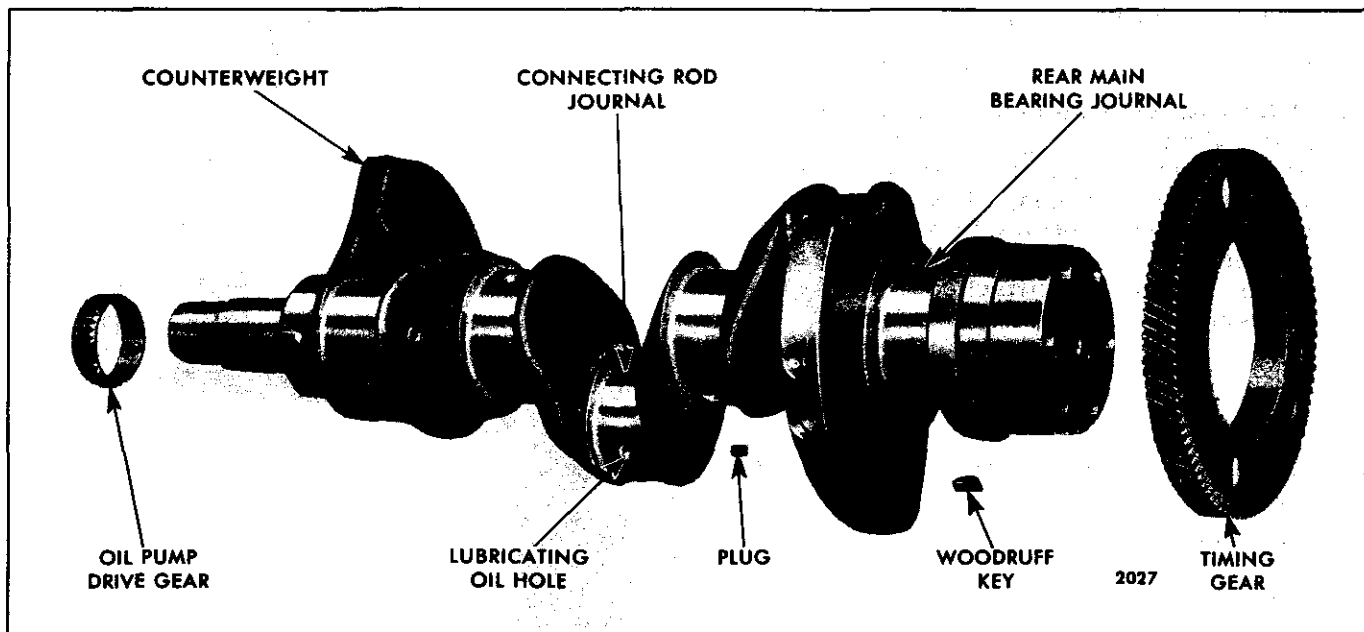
Crankshaft Details and Relative Location of Parts (3-53 Crankshaft Shown)
